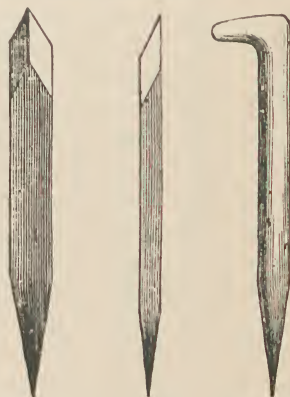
FRONT VIEW. FIG. 280. SIDE VIEW. FIG. 281. CRANKED TOOL.
